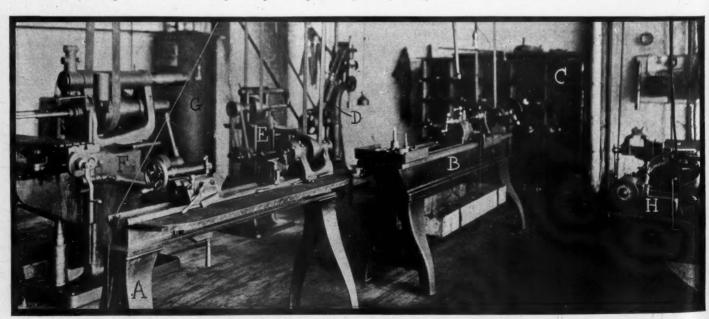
SHOWING MACHINE TOOL EQUIPMENT OF PEERLESS REPAIRSHOP, CHICAGO
